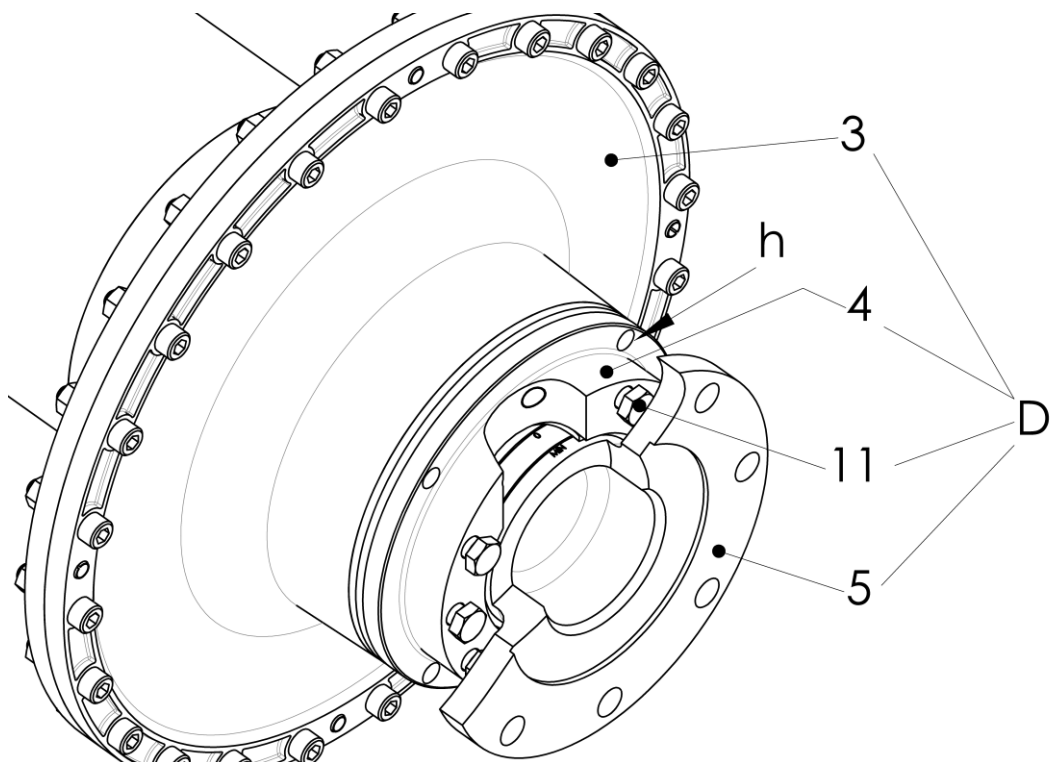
Preparing the pre-mounted supplied coupling for mounting
